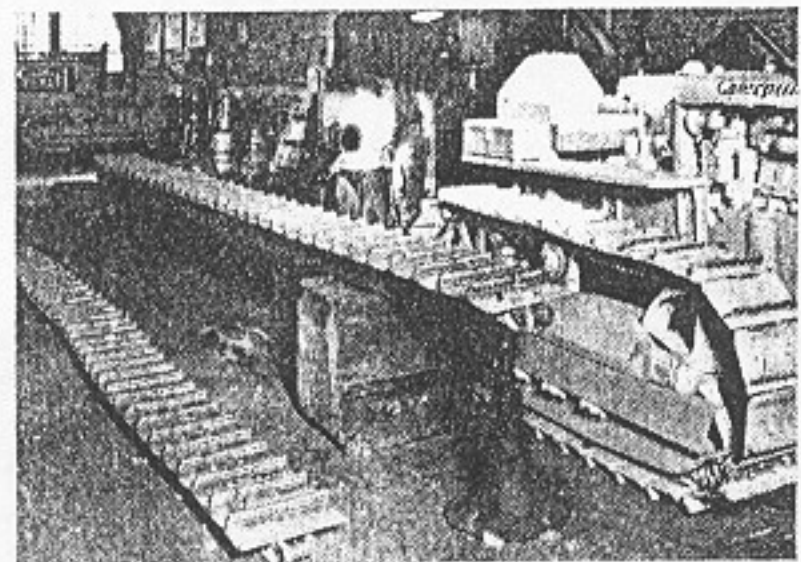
Arc welding is used to build up badly worn tractor shoes.
